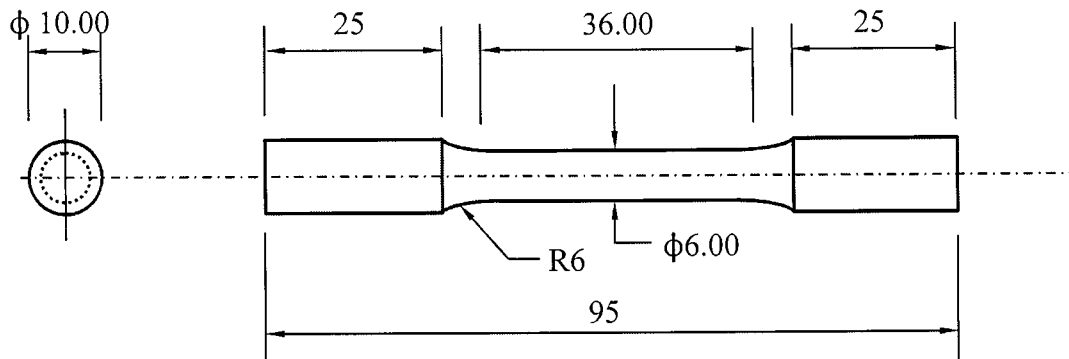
Schematic drawing of tensile specimen (dimensions in mm).
